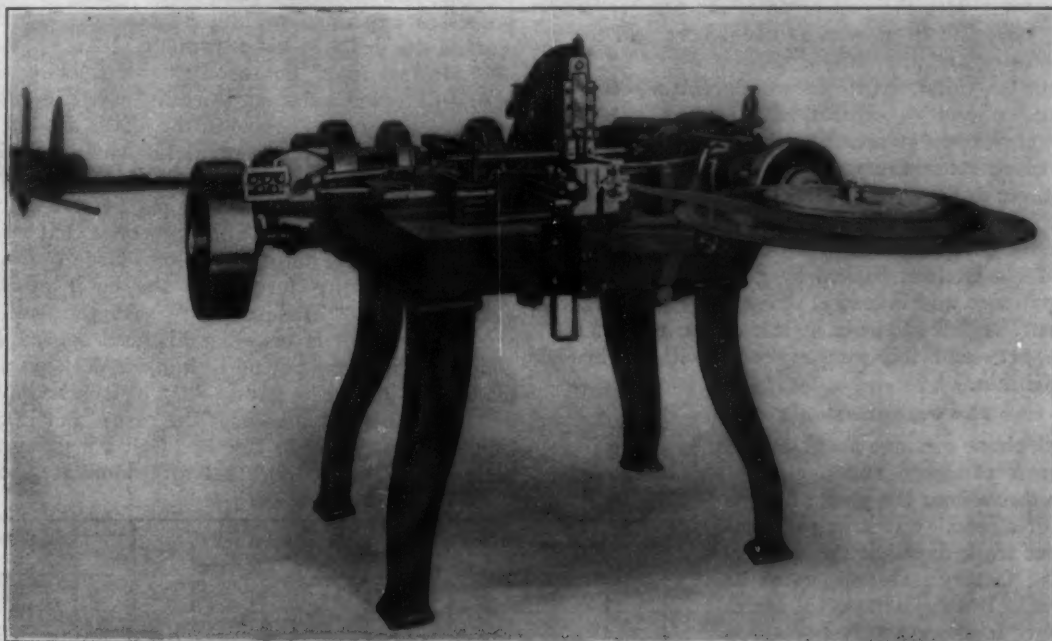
A Special Wire Forming and Ferruling Machine Built by the Baird Machine Company, Oakville, Conn.
